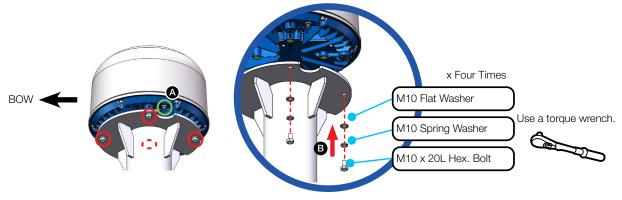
Mounting Antenna using Outer Holes (with M10 Bolts)
